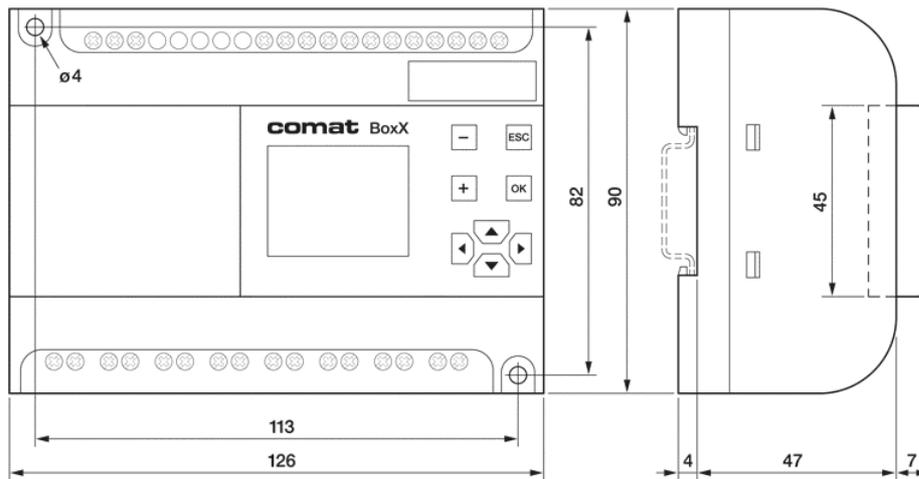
AF-20 Series installation dimensions (Unit: mm)
